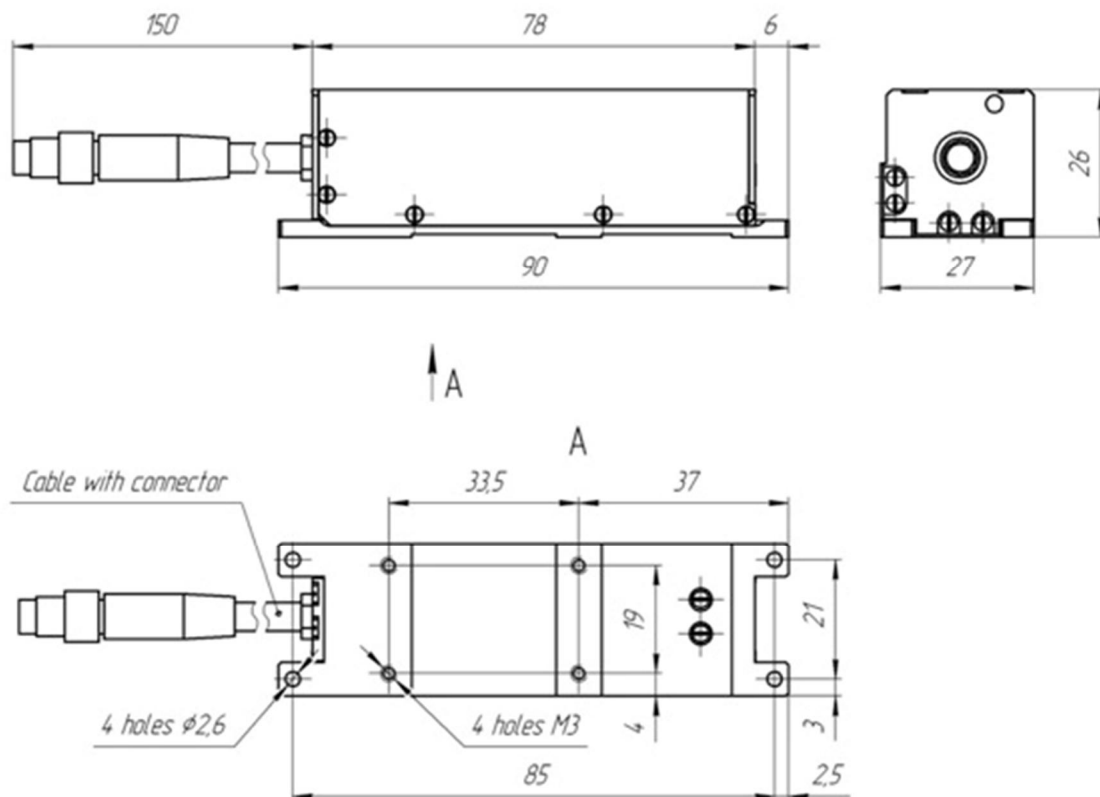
The Inertial Labs™ VG mounting surfaces A, B and mounting holes 1, 2
